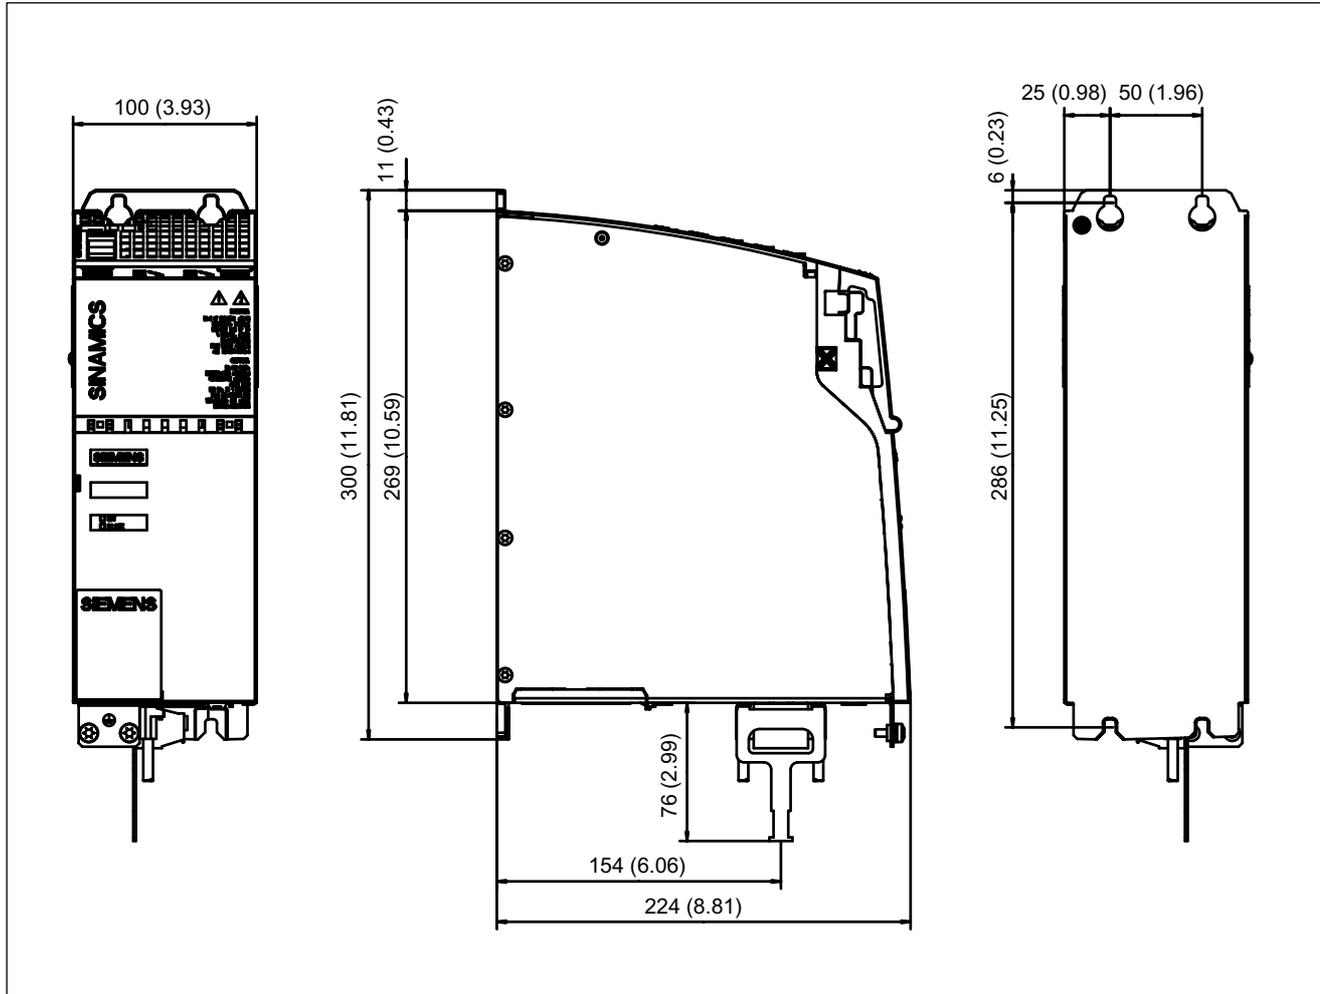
Dimension drawing Smart Line Module Booksize Compact format (16 kW), all dimensions in mm and (inches)
